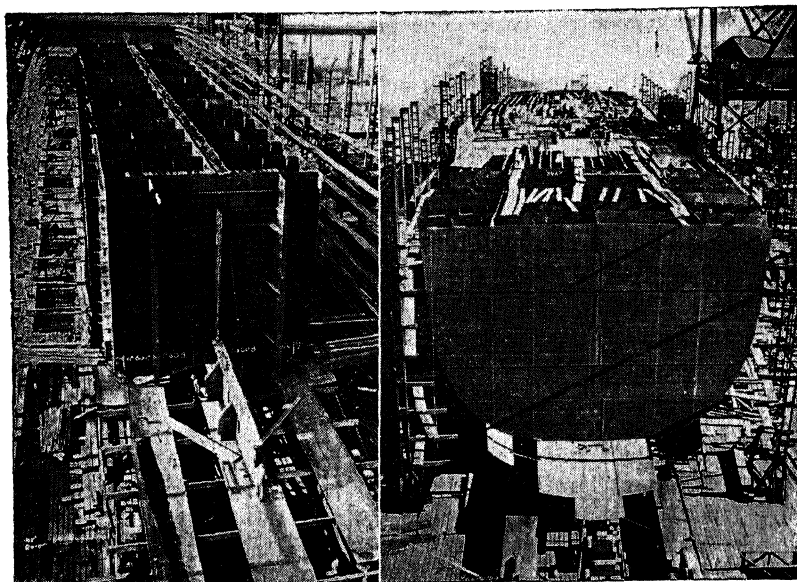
This 103,000 bbl. tanker, built for a large oil company, can carry 300 to 400 tons extra cargo because of weight savings made by welding. Welded parts include internal framing between fore and after peak bulkheads, all transfer bulkheads, bottom longitudinals, tank tops, foundations, deckhouses, rail stanchions and hatches.
